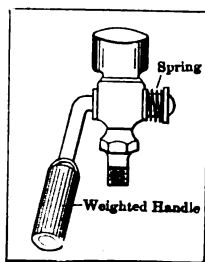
Compression cock and priming cup combined in which a spring and weighted handle tend to keep the valve tight under all conditions
